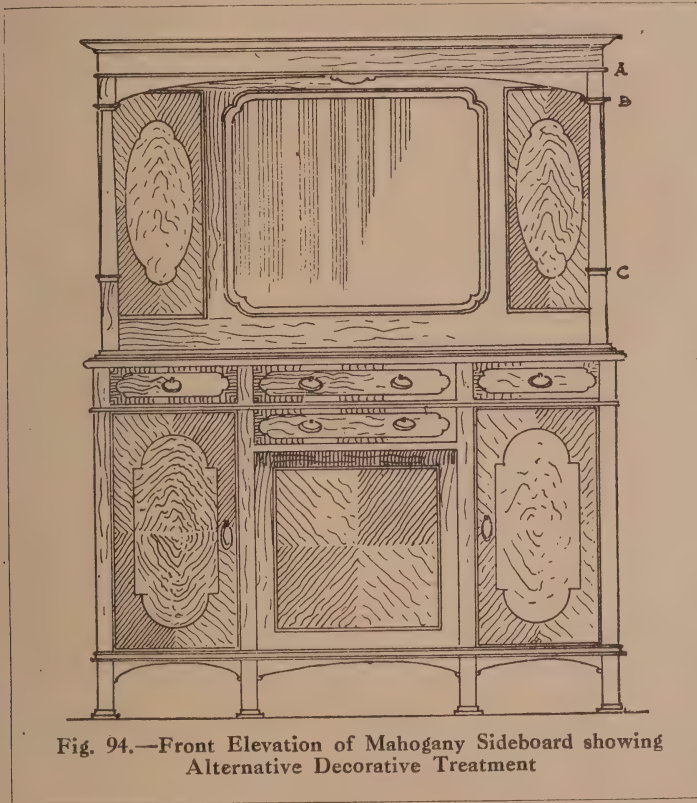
Front Elevation of Mahogany Sideboard showing Alternative Decorative Treatment
